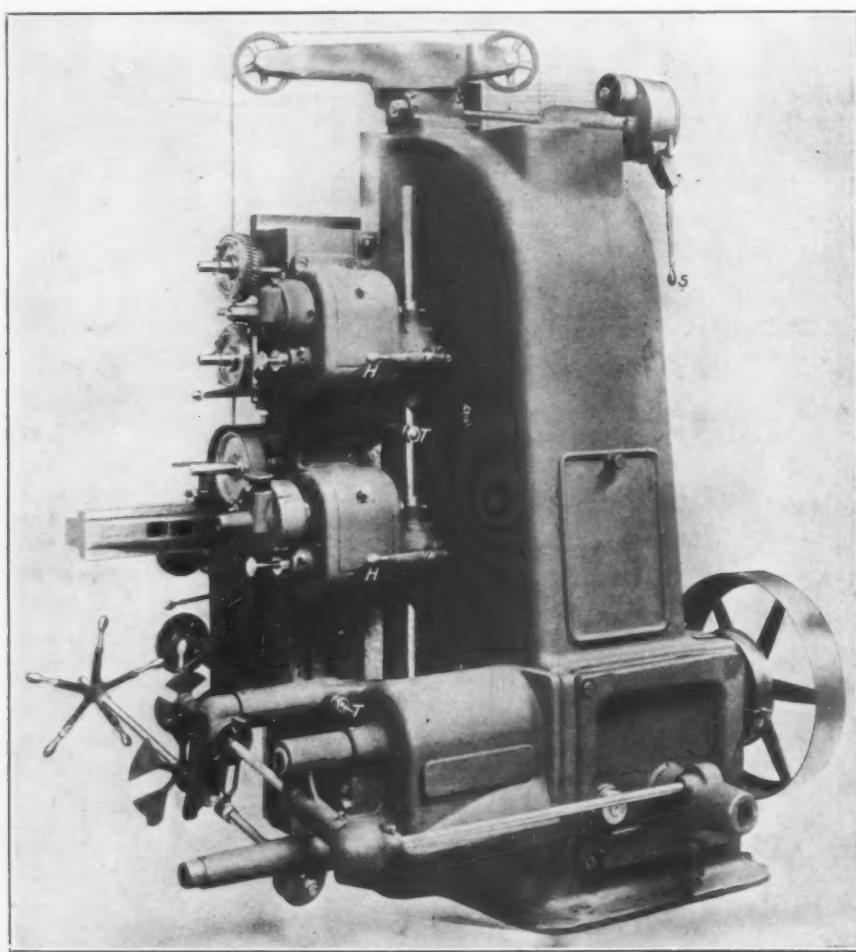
Rear View of the Bullard Vertical Turret Lathe.
